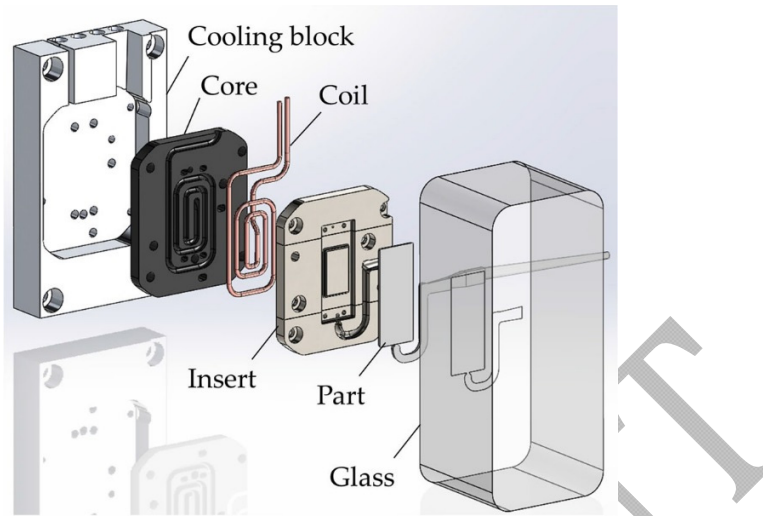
Exploded view of the components around the glass and insert. The core, coil, and insert are put together and inserted into the mold block with the cooling channels
